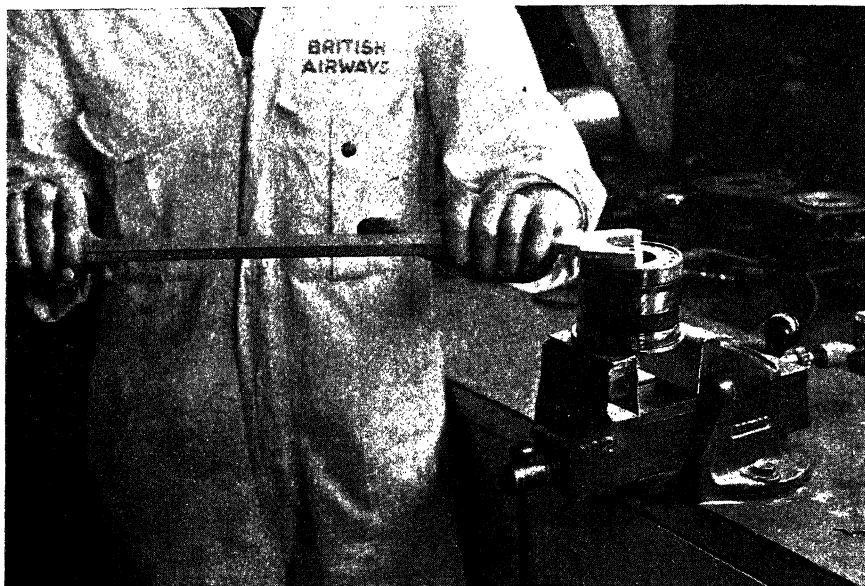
REMOVING CLUTCH ADJUSTING NUT
